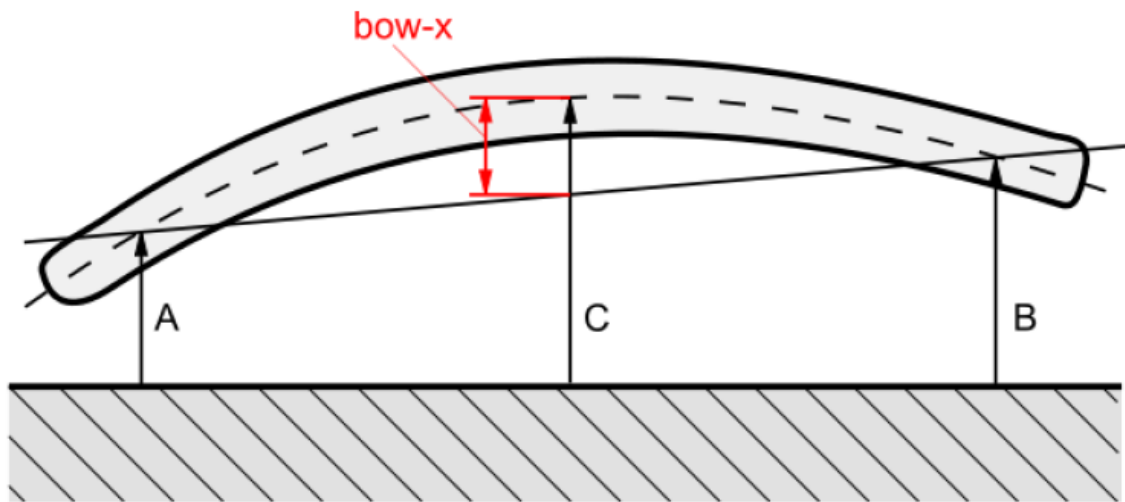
Cross-sectional View: How Bow-X is measured, Contactless Wafer Geometry Gauge device. Figure adopted
